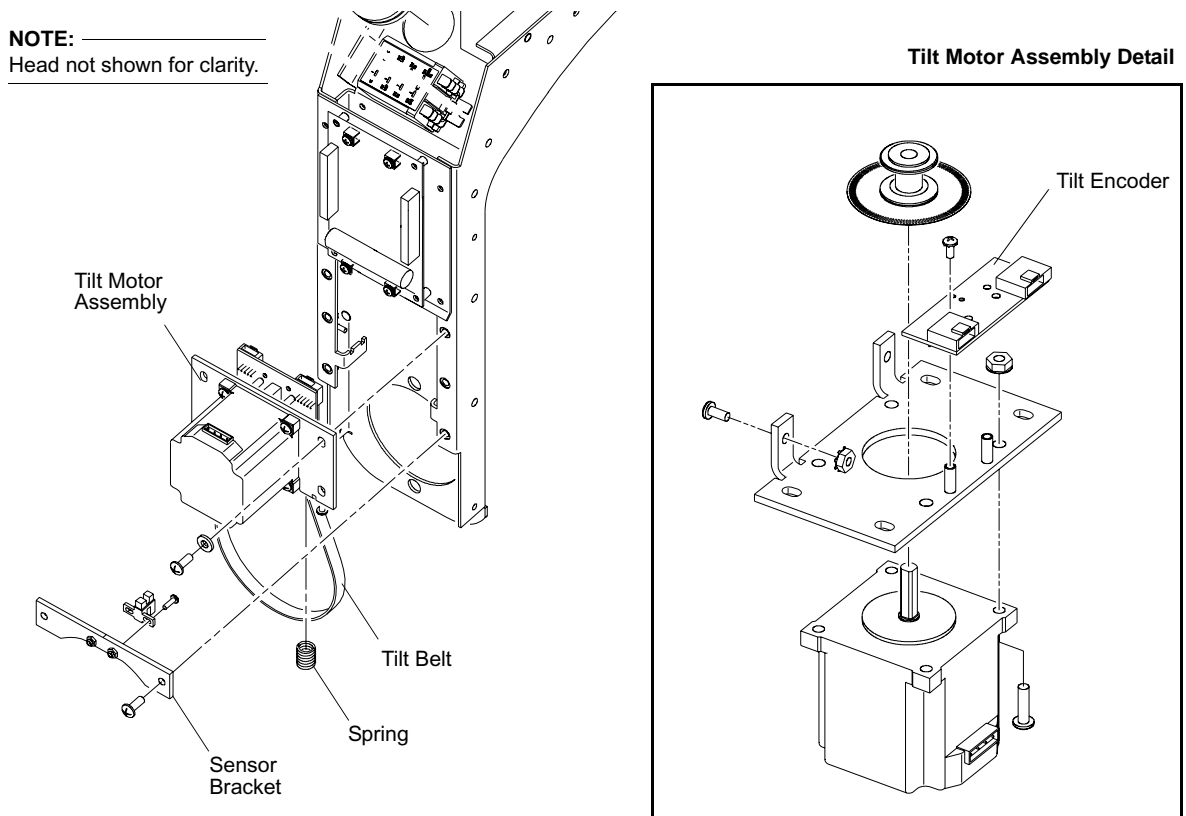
VL3000 Tilt Encoder PCB Replacement
